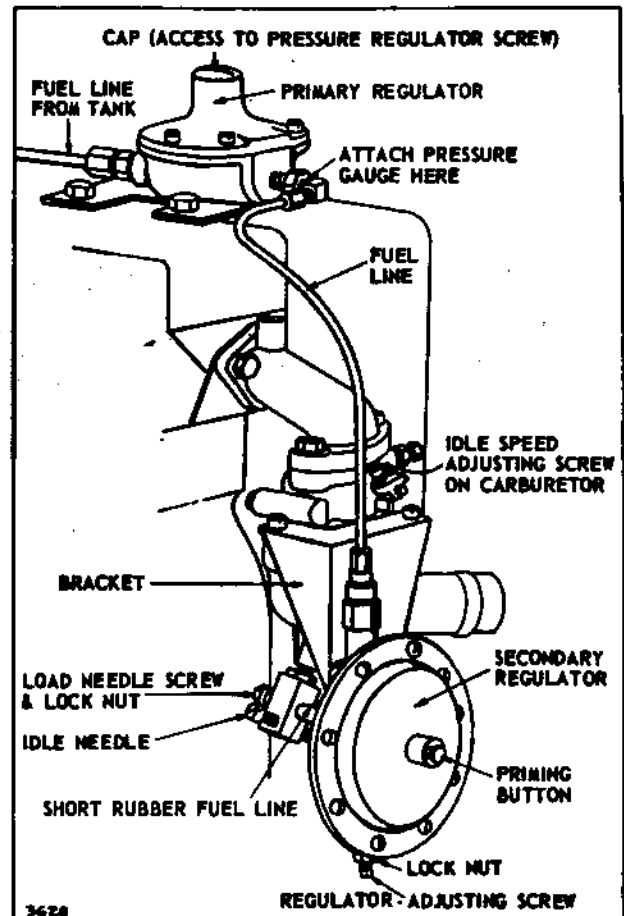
Adjusting Carburetor, L. P. Fuel System
